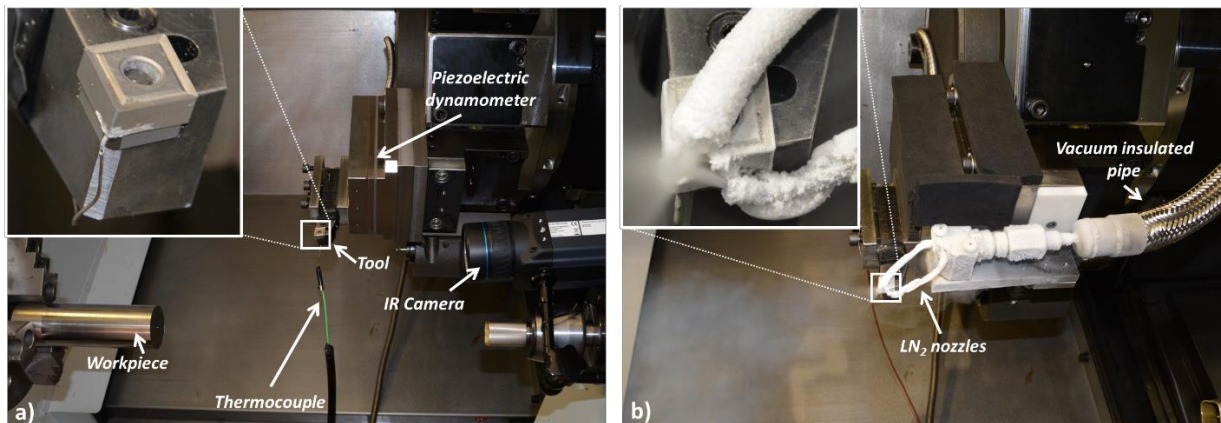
a) Experimental set-up used to perform machining test under dry conditions; b) Cryogenic delivery system detail.
